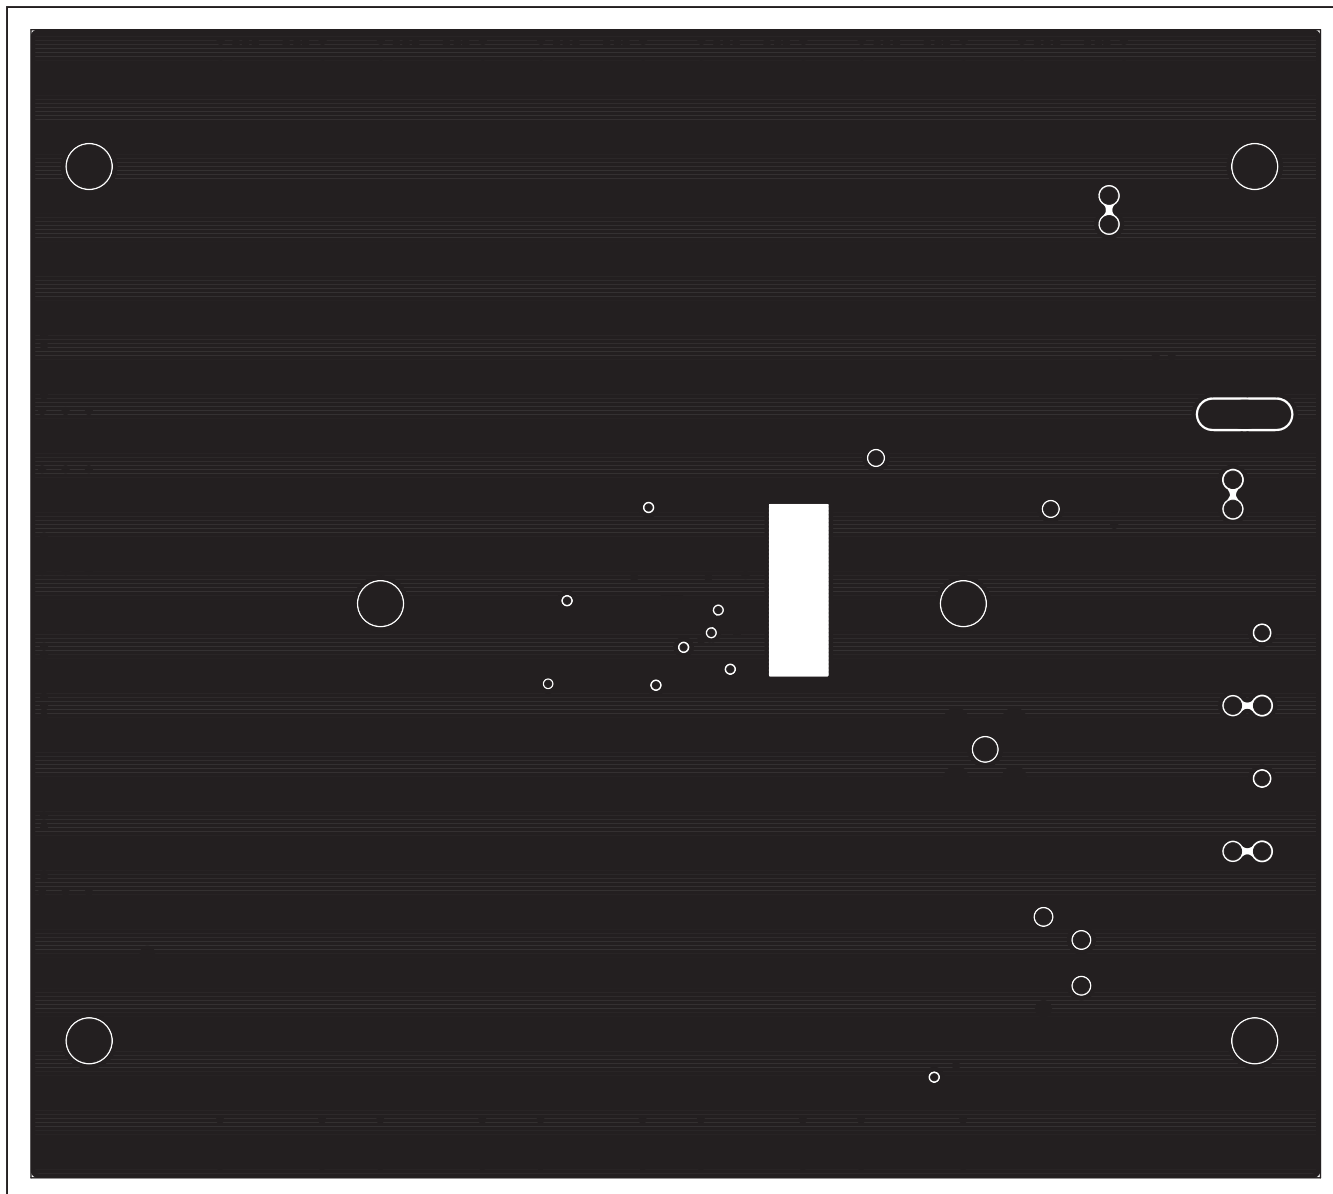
MAX3677 EV Kit PCB Layout—Ground Plane
